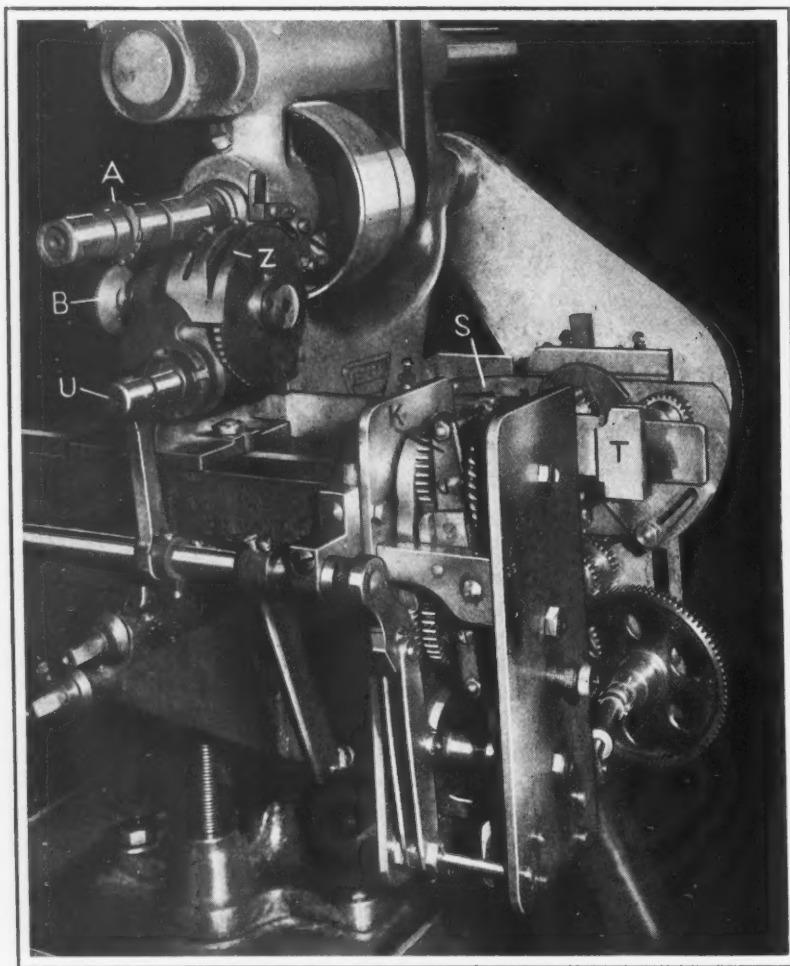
Special Equipment Provided on the Hand Milling Machine for Cutting Accurate Gears and Other Parts
